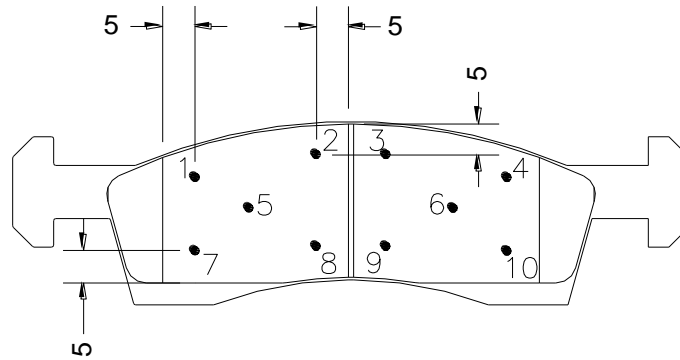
MEASUREMENT POINTS FOR DISC PAD ASSEMBLIES
